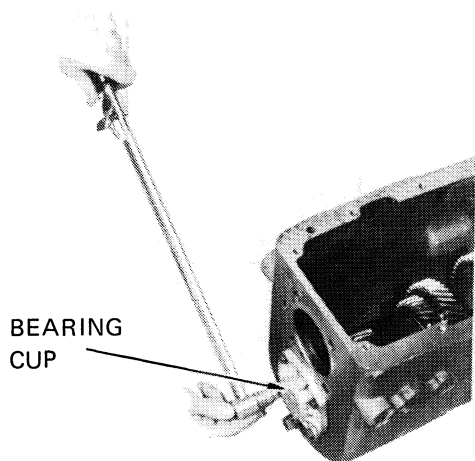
DISASSEMBLY OF THE TRANSMISSION (Sheet 3 of 3)
